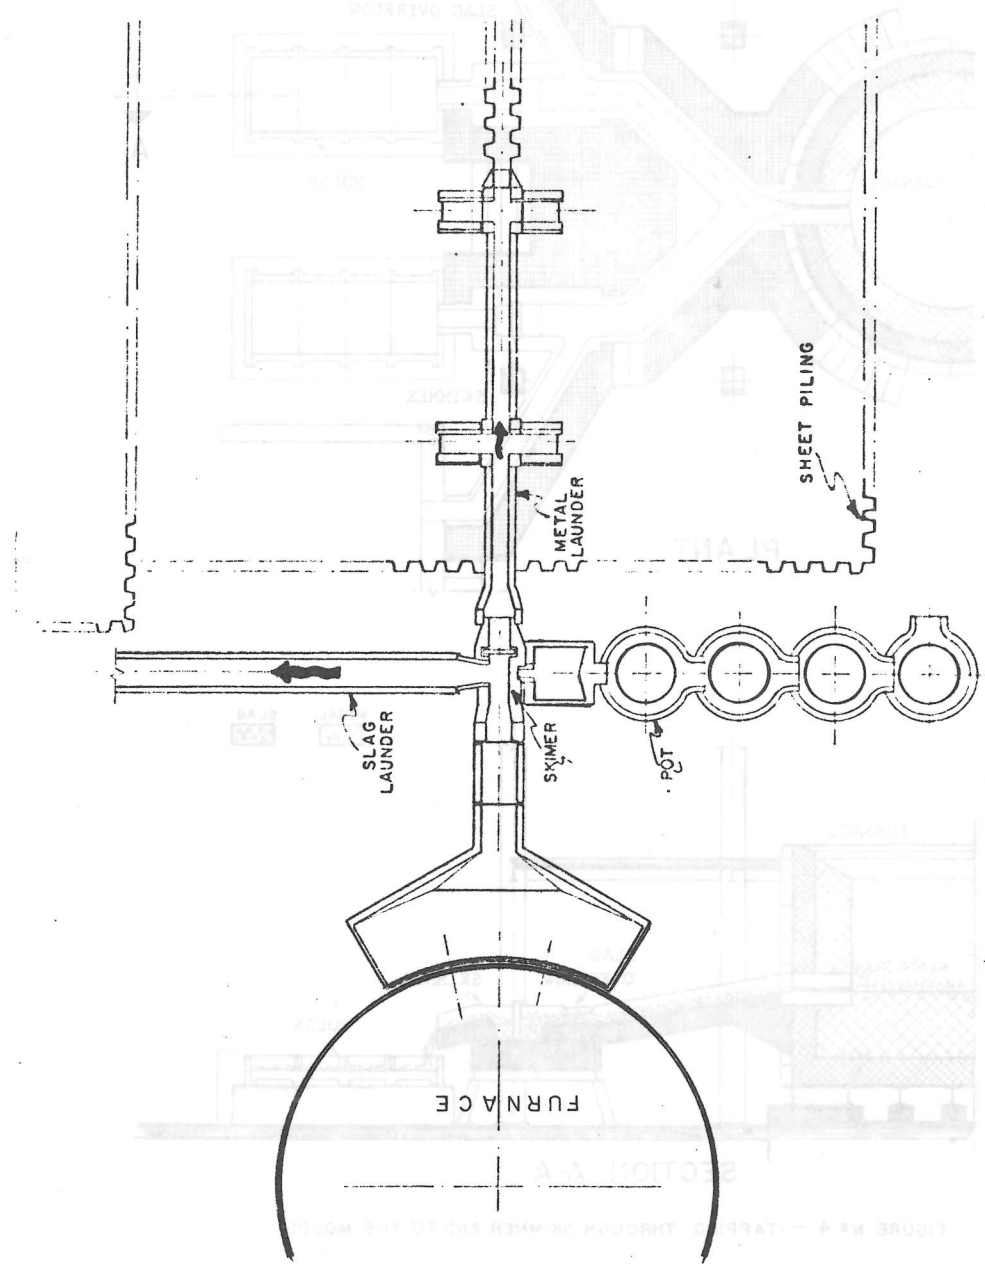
TAPPING WITH SKIMER AND STACK CASTING (TEMCO)
